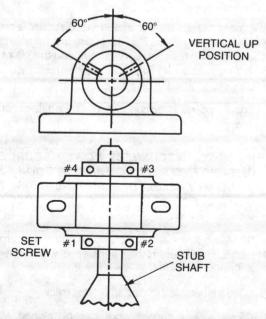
Instruction Sketch for Pillow Block Bearing with Double Lock Setscrew
